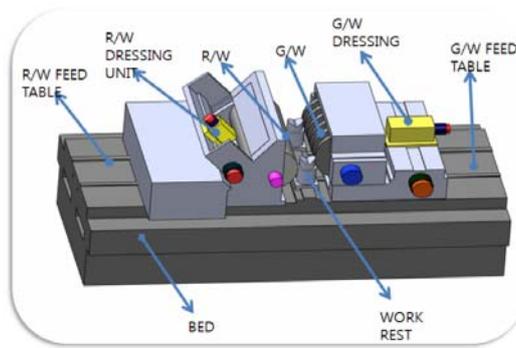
Wide Wheel Width Centerless Grinding Machine of 3D model design
